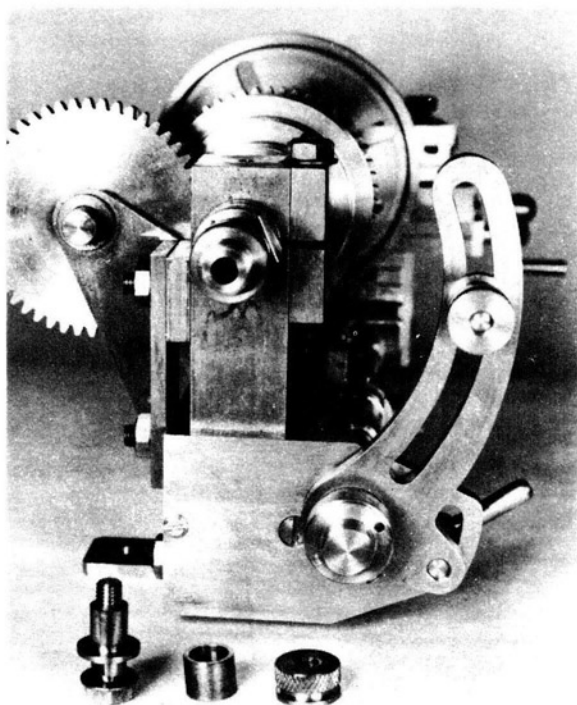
Change wheel banjo assembled on its bearing plate, with one change wheel stud disassembled.
